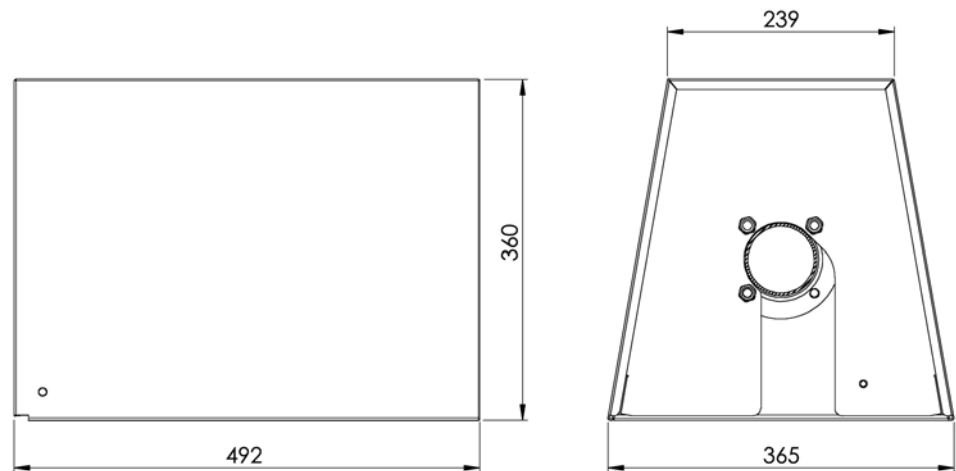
Weather hood housing for the sender/receiver unit (dimensions in mm)
